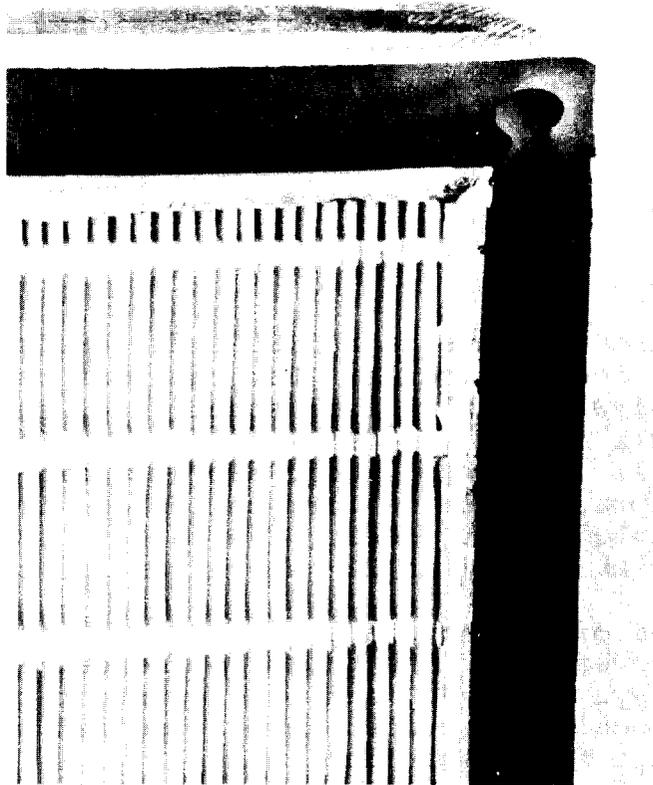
Sealant and Dovetail Gasket Joint, Flat Panel Filter
